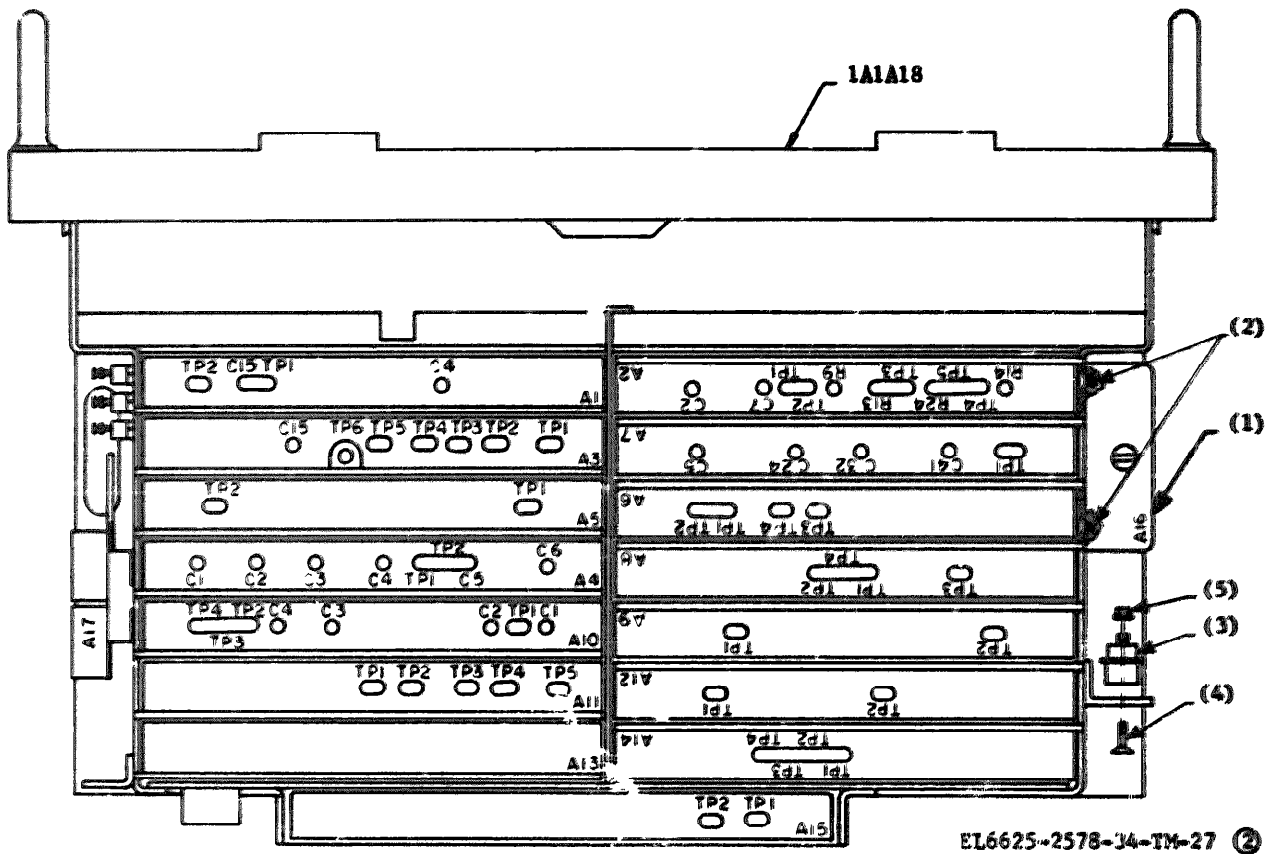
(2). Test set front panel module assembly, component location diagram (part 2 of 2).
